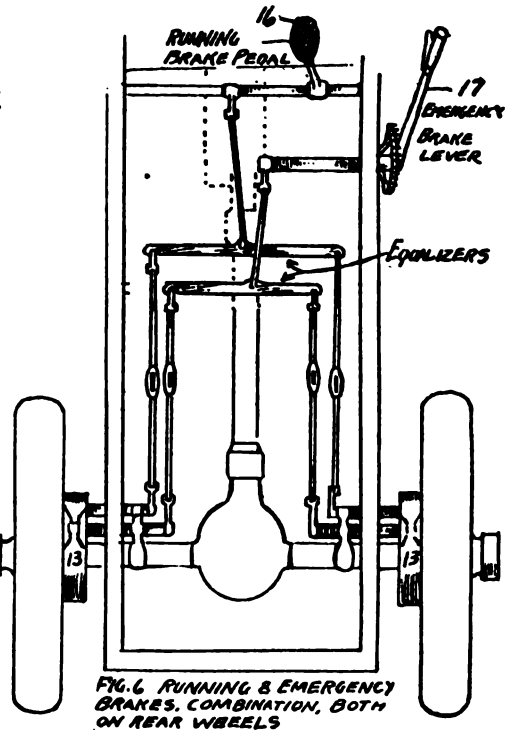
RUNNING & EMERGENCY BRAKES, COMBINATION, BOTH ON REAR WHEELS
